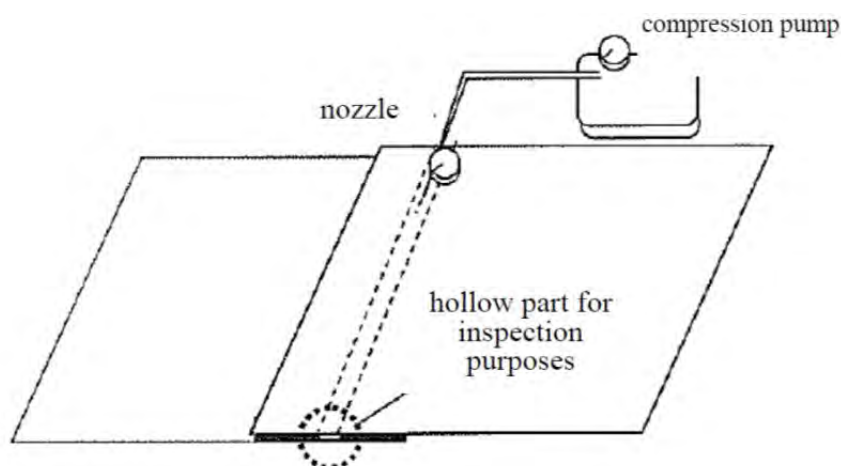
Inspection Example of a Joining Section 2 (pressure inspection)
